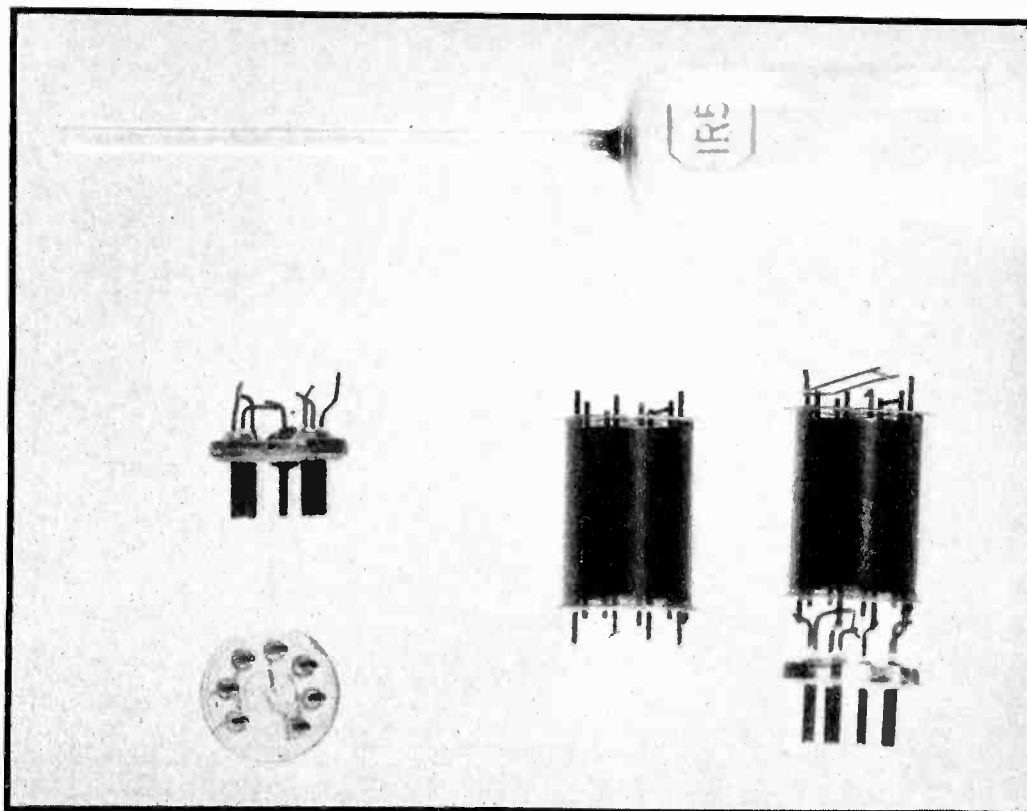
Component parts of the 1R5 converter: button press, elements and completely assembled mount. Minimum use of material results in lowered production costs
